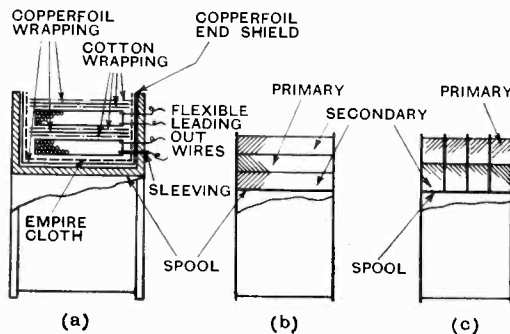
Winding assemblies for shell type transformer. All copper foils soldered to common shield wire.
